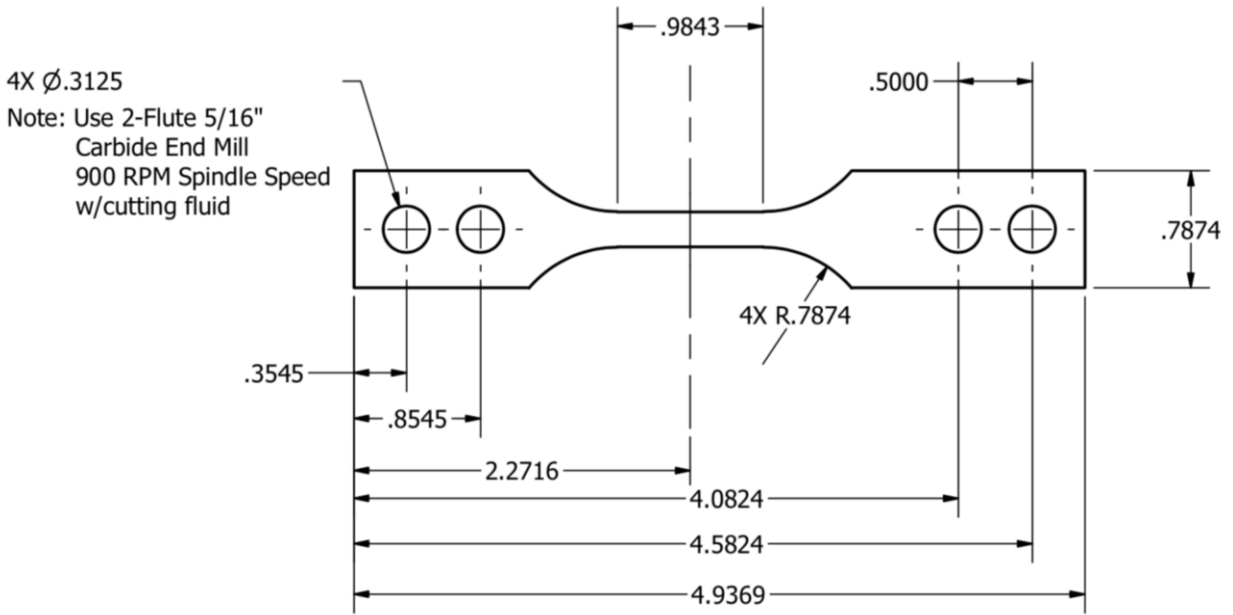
Servo-hydraulic specimen geometry for grip-loaded and pin-loaded geometries. Dimensions are expressed in inches.
